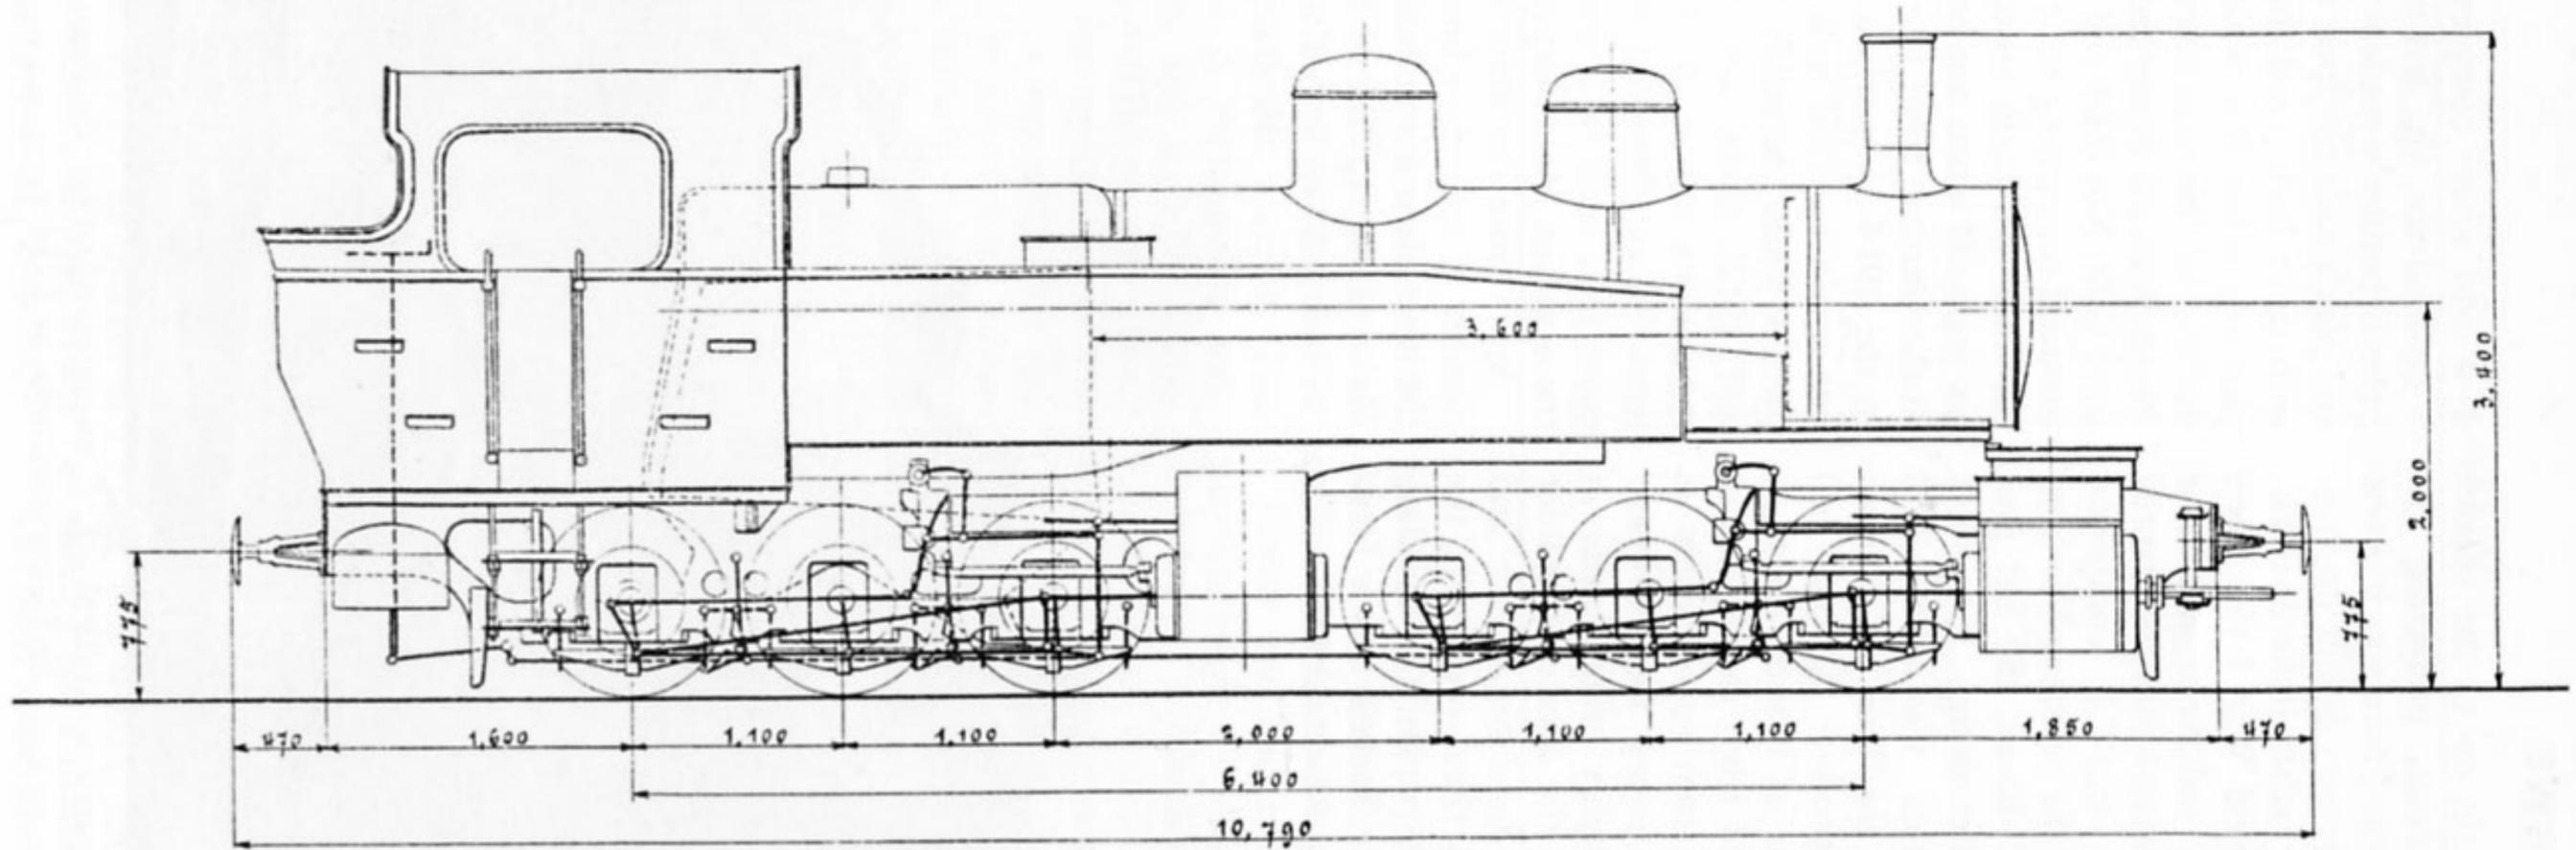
French departmental railways, Vivarais section, 0-6-6-0T built by the Société Alsacienne de Constructions Mécaniques (SACM)
